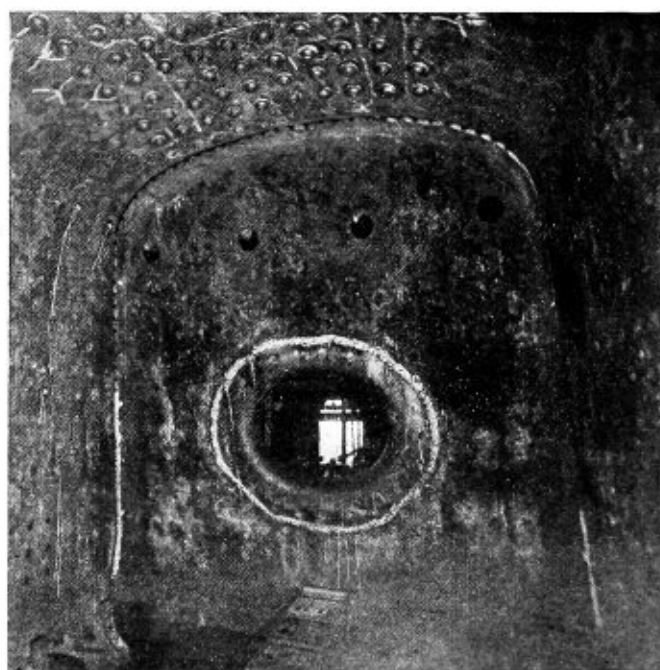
Welded Door Sheet—Pacific Type Locomotive
